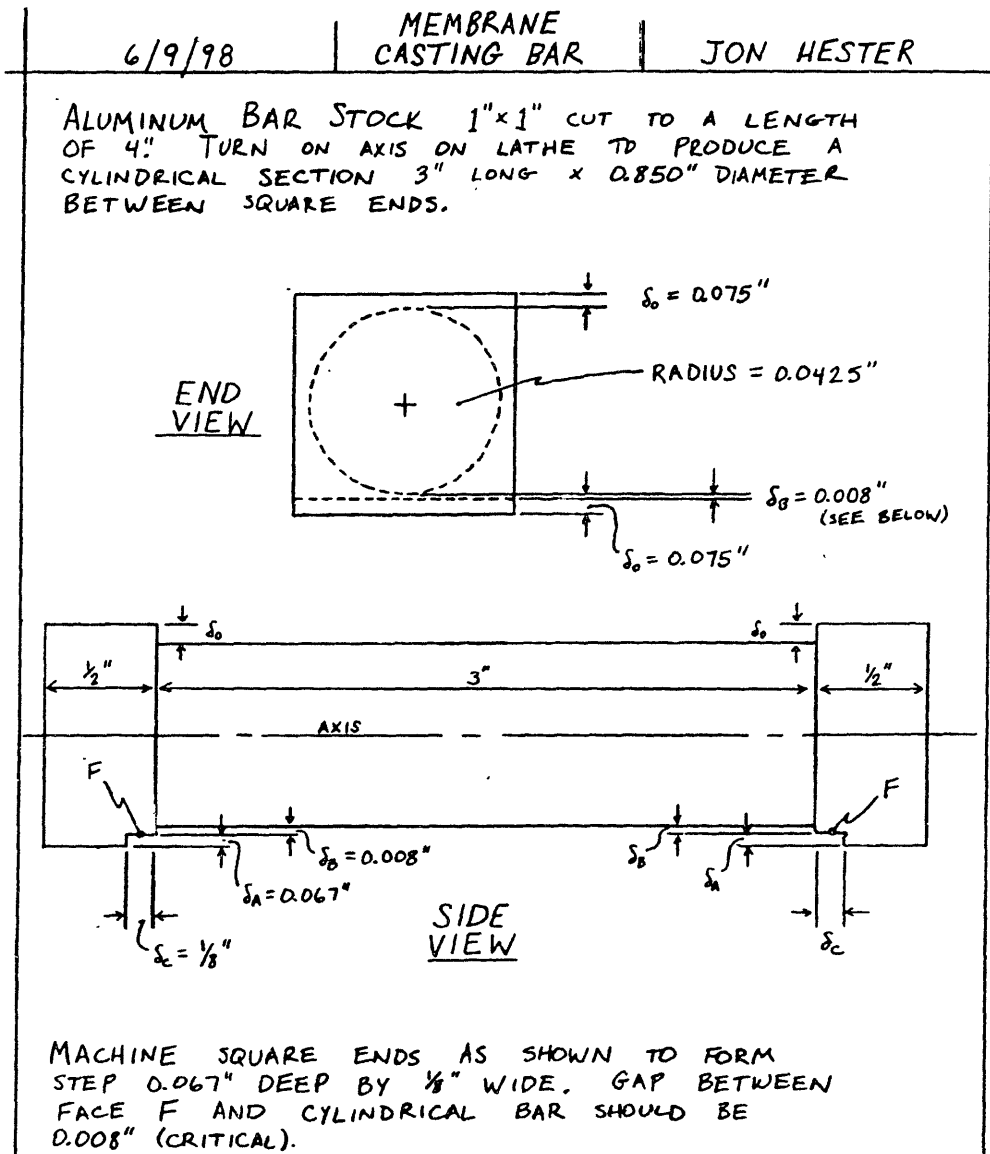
Machine drawing of membrane casting bar with 8 mil gate size
